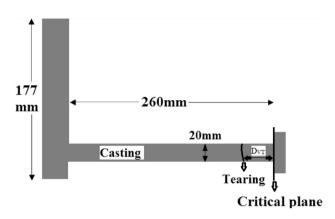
Dimension of T-shaped mold where thickness is 20 mm.
